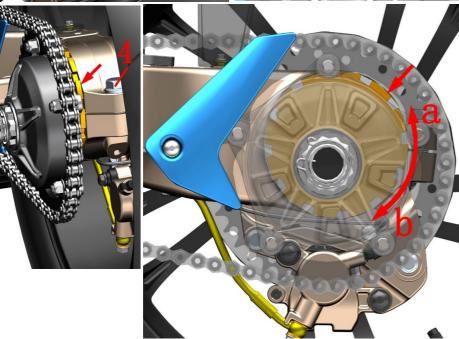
Rear wheel, swinging arm assembly		Adjustment chain	CHK	Q
